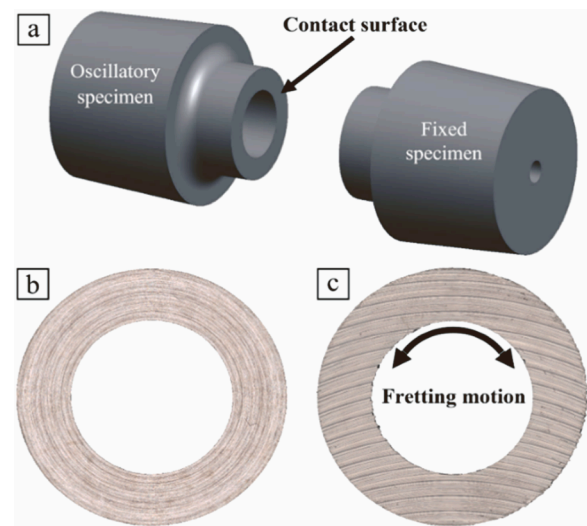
(a) 3D view of fretting test specimens, Alicona optical profilometry images of (b) smooth and (c) rough surfaces.
